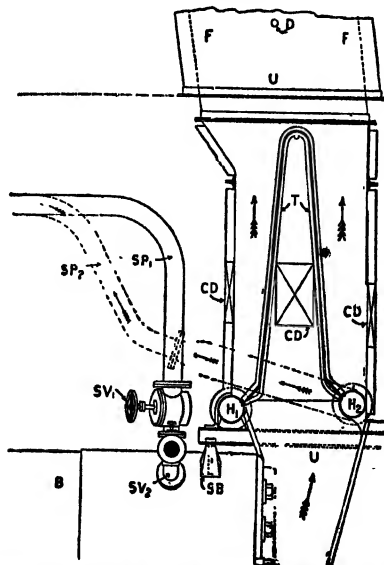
PROF. WATKINSON'S SUPERHEATER FOR MARINE BOILERS.
